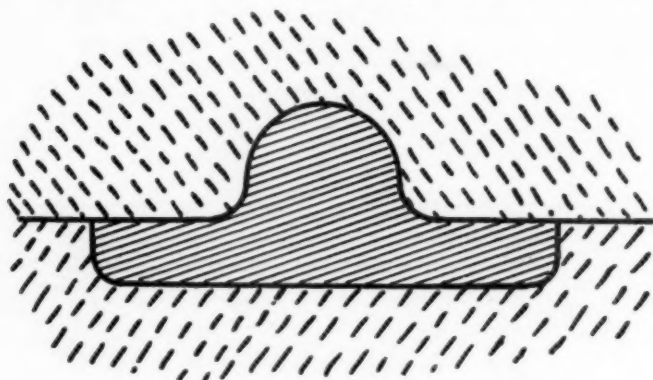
FILLETS IN "OPEN" CARDED PATTERNS
